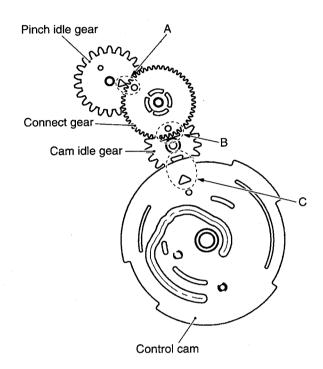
Gear Positioning 1 (Bottom Panel Side)
